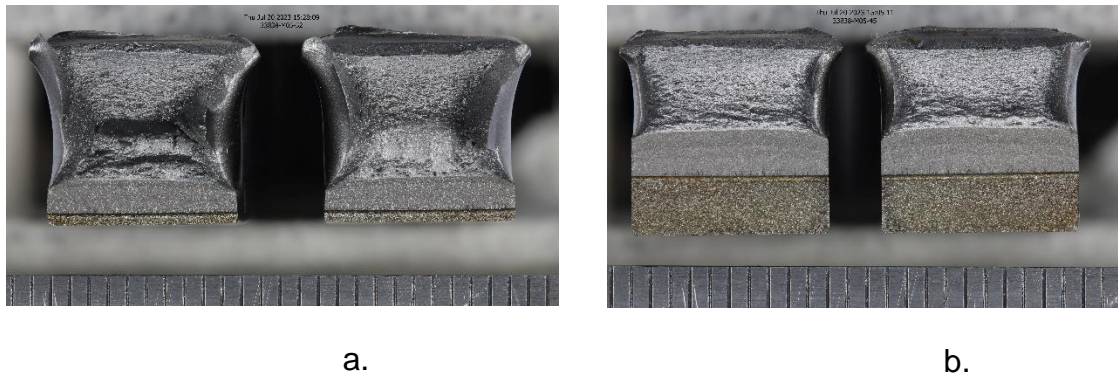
Cracked specimens showing the EDM notched, fatigue pre-cracked and fractured surfaces for, (a)  $a_0/W$  of 0.2, (b)  $a_0/W$  of 0.5. (© TWI)
